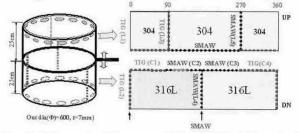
Schematic Diagram of the Welded Structural Specimen
